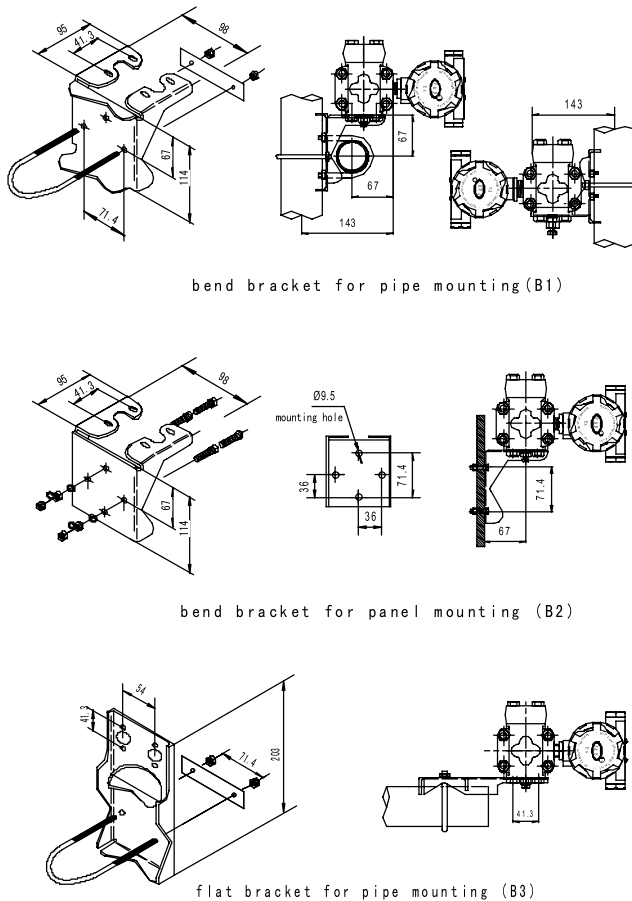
sketch map of mounting bracket dimension and mounting configuration
